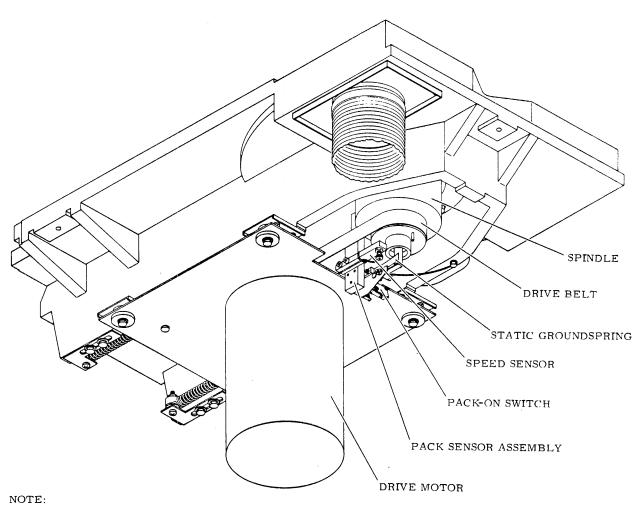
Assembly Locator (Non-VDE) (Sheet 1 of 2)
